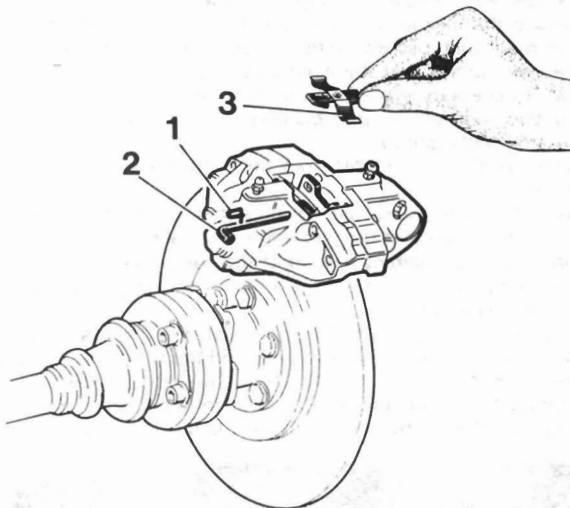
Rear caliper clip (1), pad retaining pin (2) and anti-rattle spring (3) (Sec 4)
